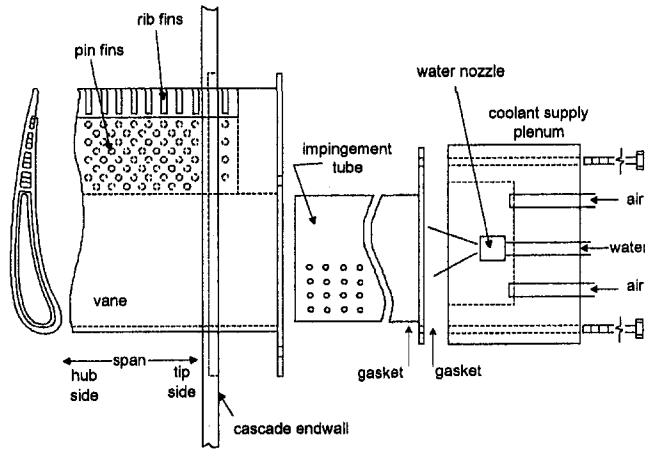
Schematic showing the vane cross section with the impingement tube and coolant plenum assembly
